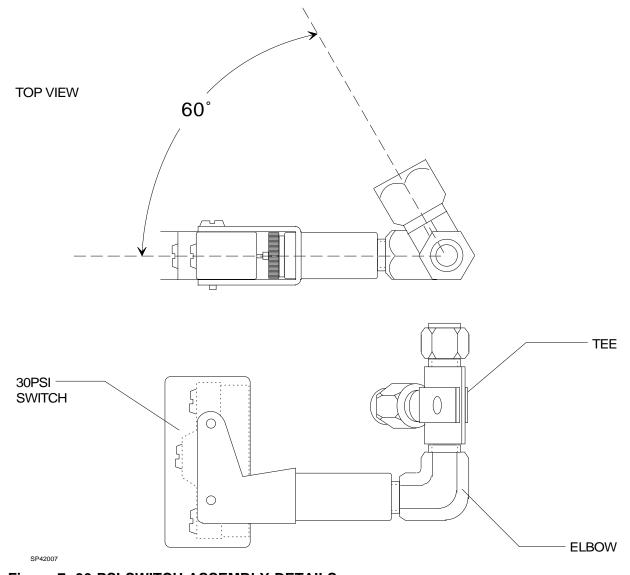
30 PSI SWITCH ASSEMBLY DETAILS
